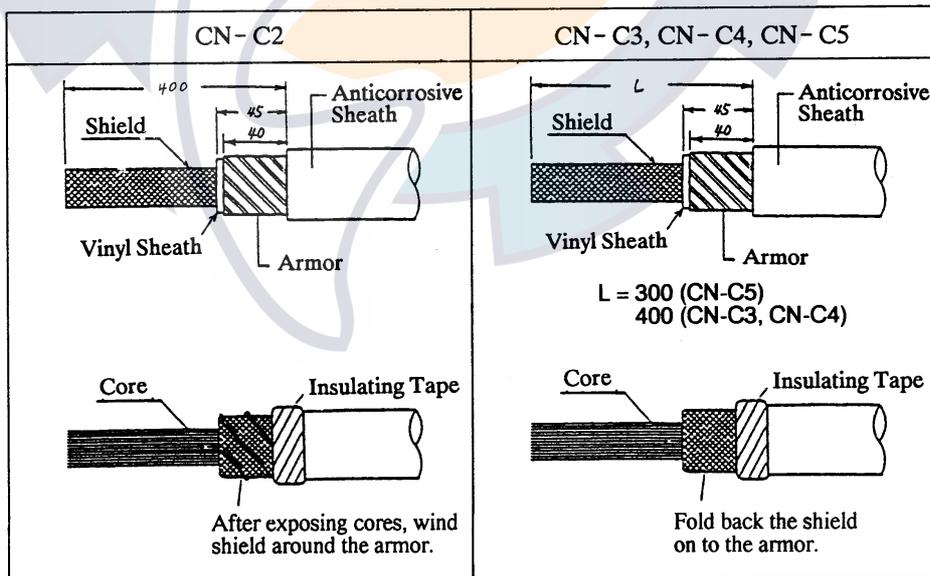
Fabricating cable 54-038-000-601/SC, 00-8016-020-000-703V
